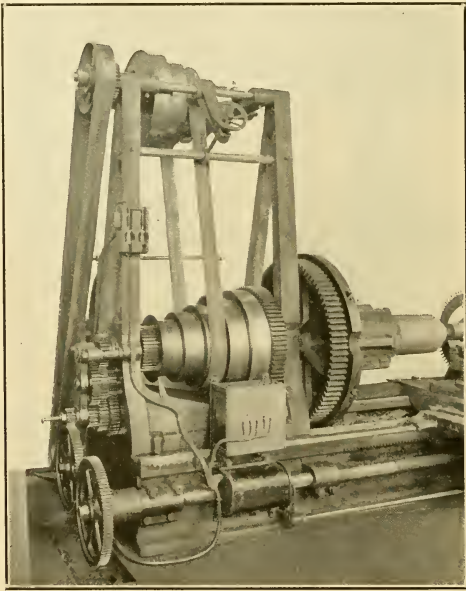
42-IN. MILES-BEMENT LATHE DRIVEN BY CONSTANT-SPEED MOTOR
